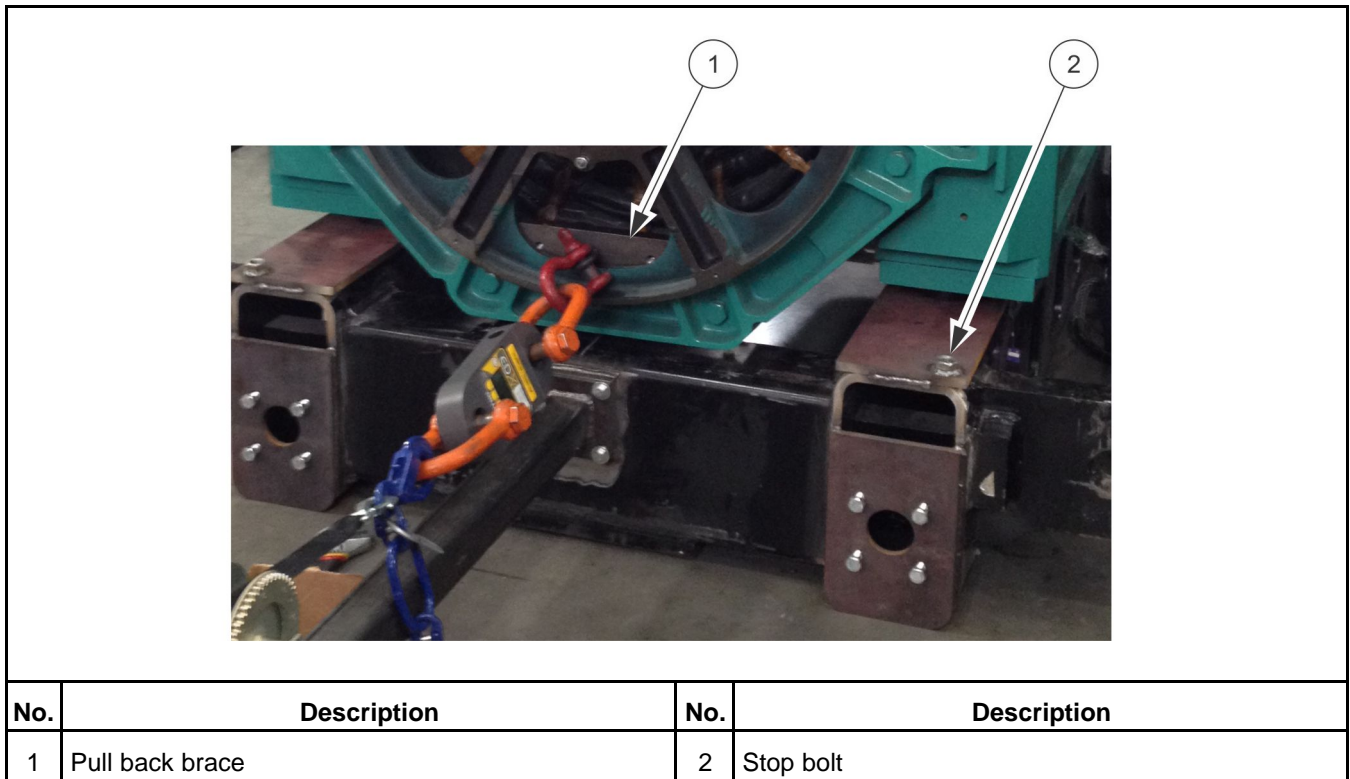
PULL BACK BRACE AND STOP BOLT
